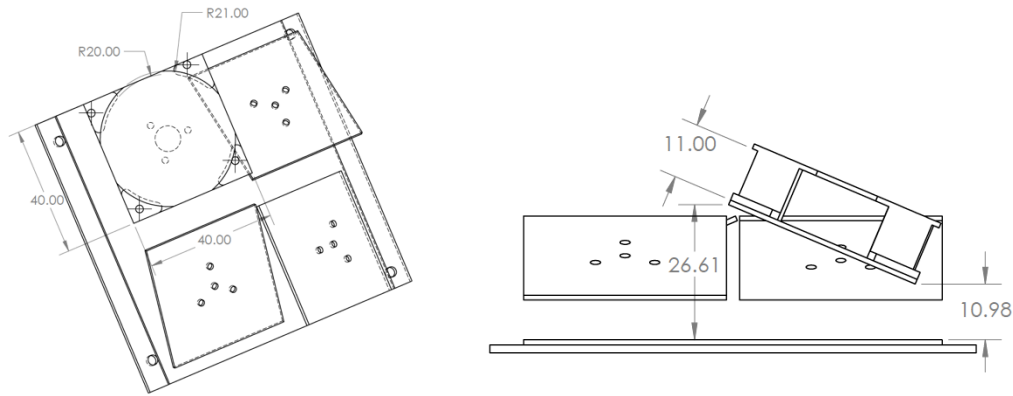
Preliminary SOLIDWORKS design of reaction wheel placements onto the PCB board
